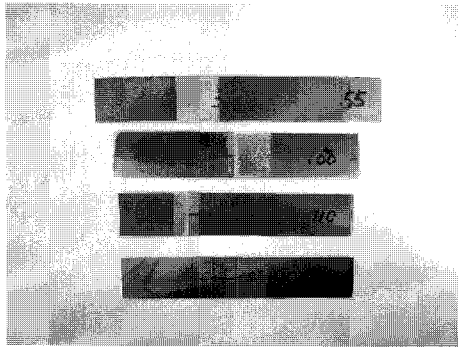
Spot-welded thin plates for ultrasonic inspection
